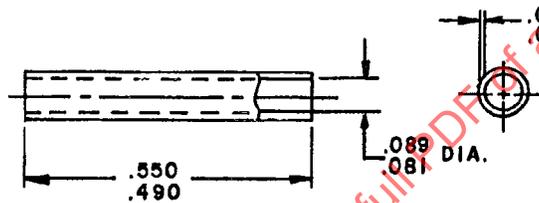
SLEEVE, SEALING, COAXIAL CABLE
